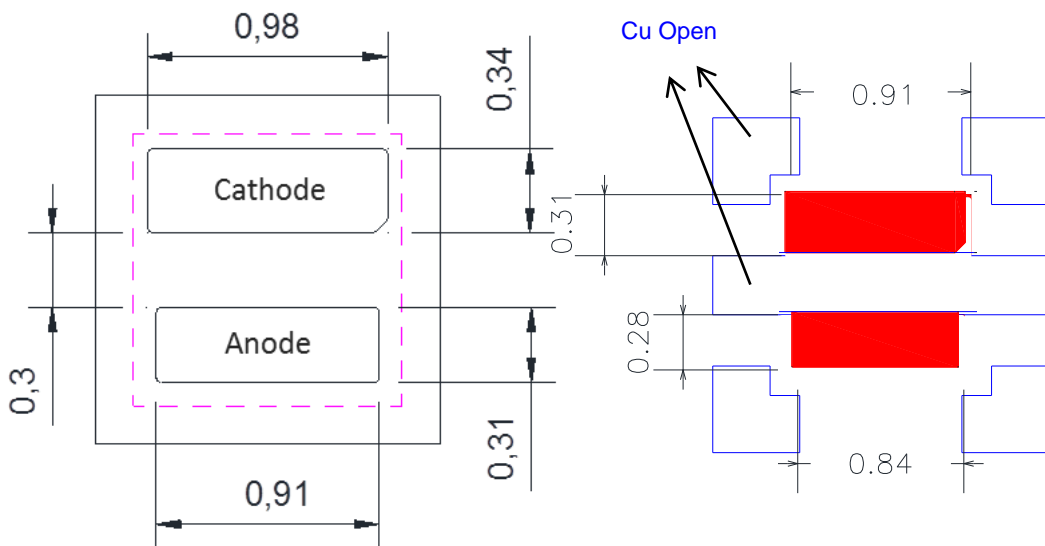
(b). Referenced PCB Footprint for. Y15 All dimensions in mm.
